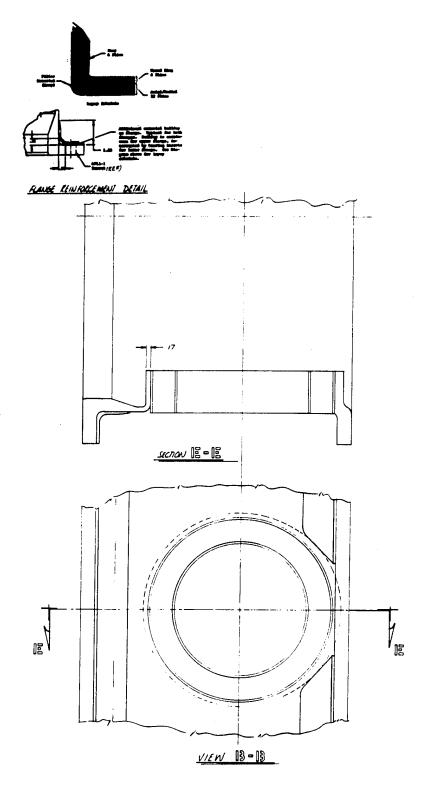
Shell Assembly - Helicopter Transmission Housing (WRD Drawing No. 4691).
